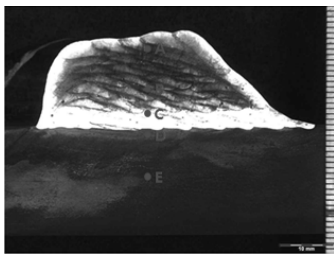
Vicker's hardness results measured at weld parts of Pad overlay weld
